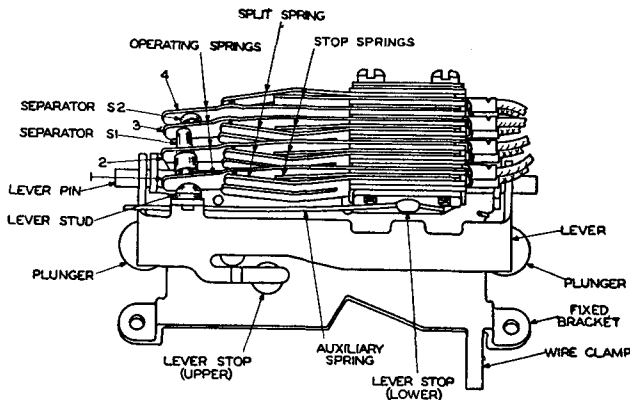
Switch Assembly for the P-339939 Mounting Assembly
